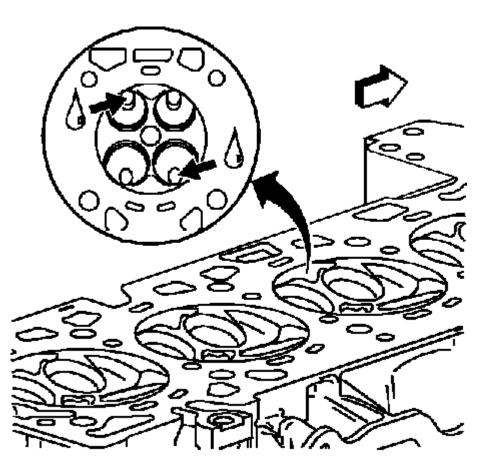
View Of Cylinder Head Plugs Courtesy of GENERAL MOTORS CORP.
